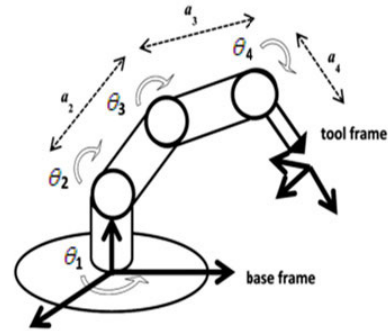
Schematic diagram of the proposed mobile welding manipulator.
